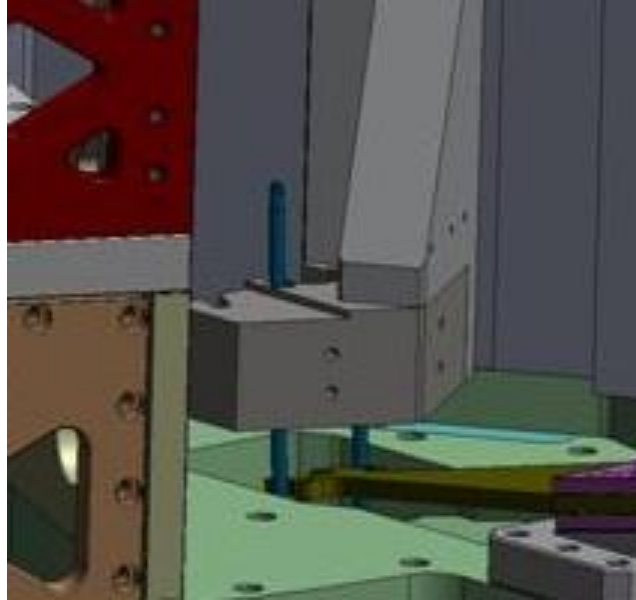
D0902188 Rods in place in D0902276 Flexure Rod Bracket
